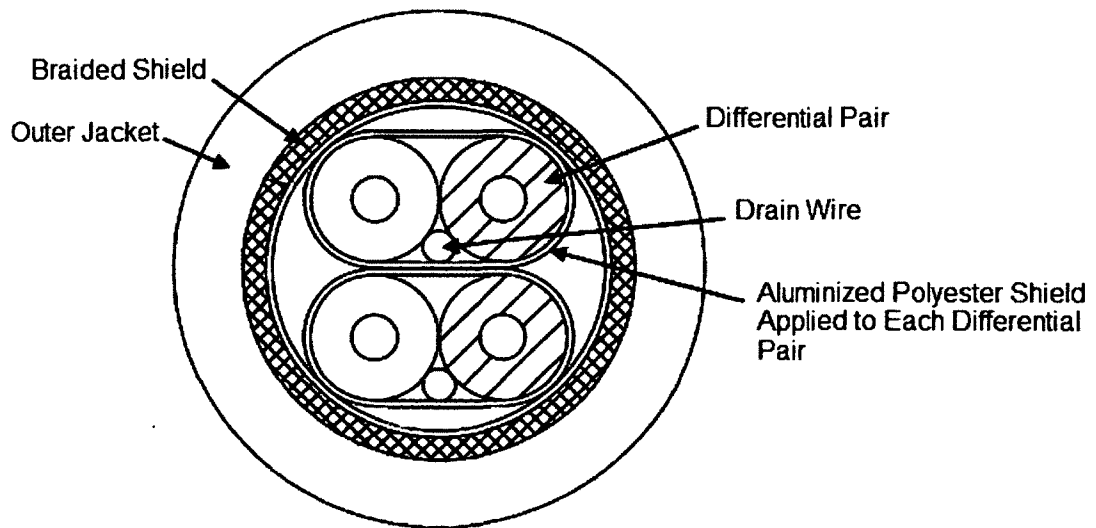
Cross-section, Commercial Twinaxial Cable Assembly
